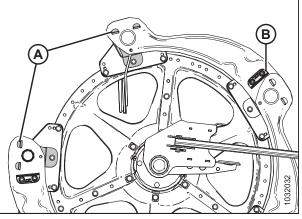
Reel Endshield Removed – Outboard Tail End
